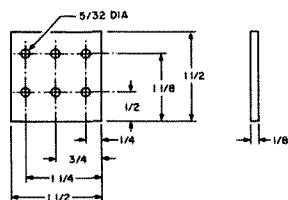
Teflon insulator construction. Use the drill guide and a block of wood when drilling this material.
